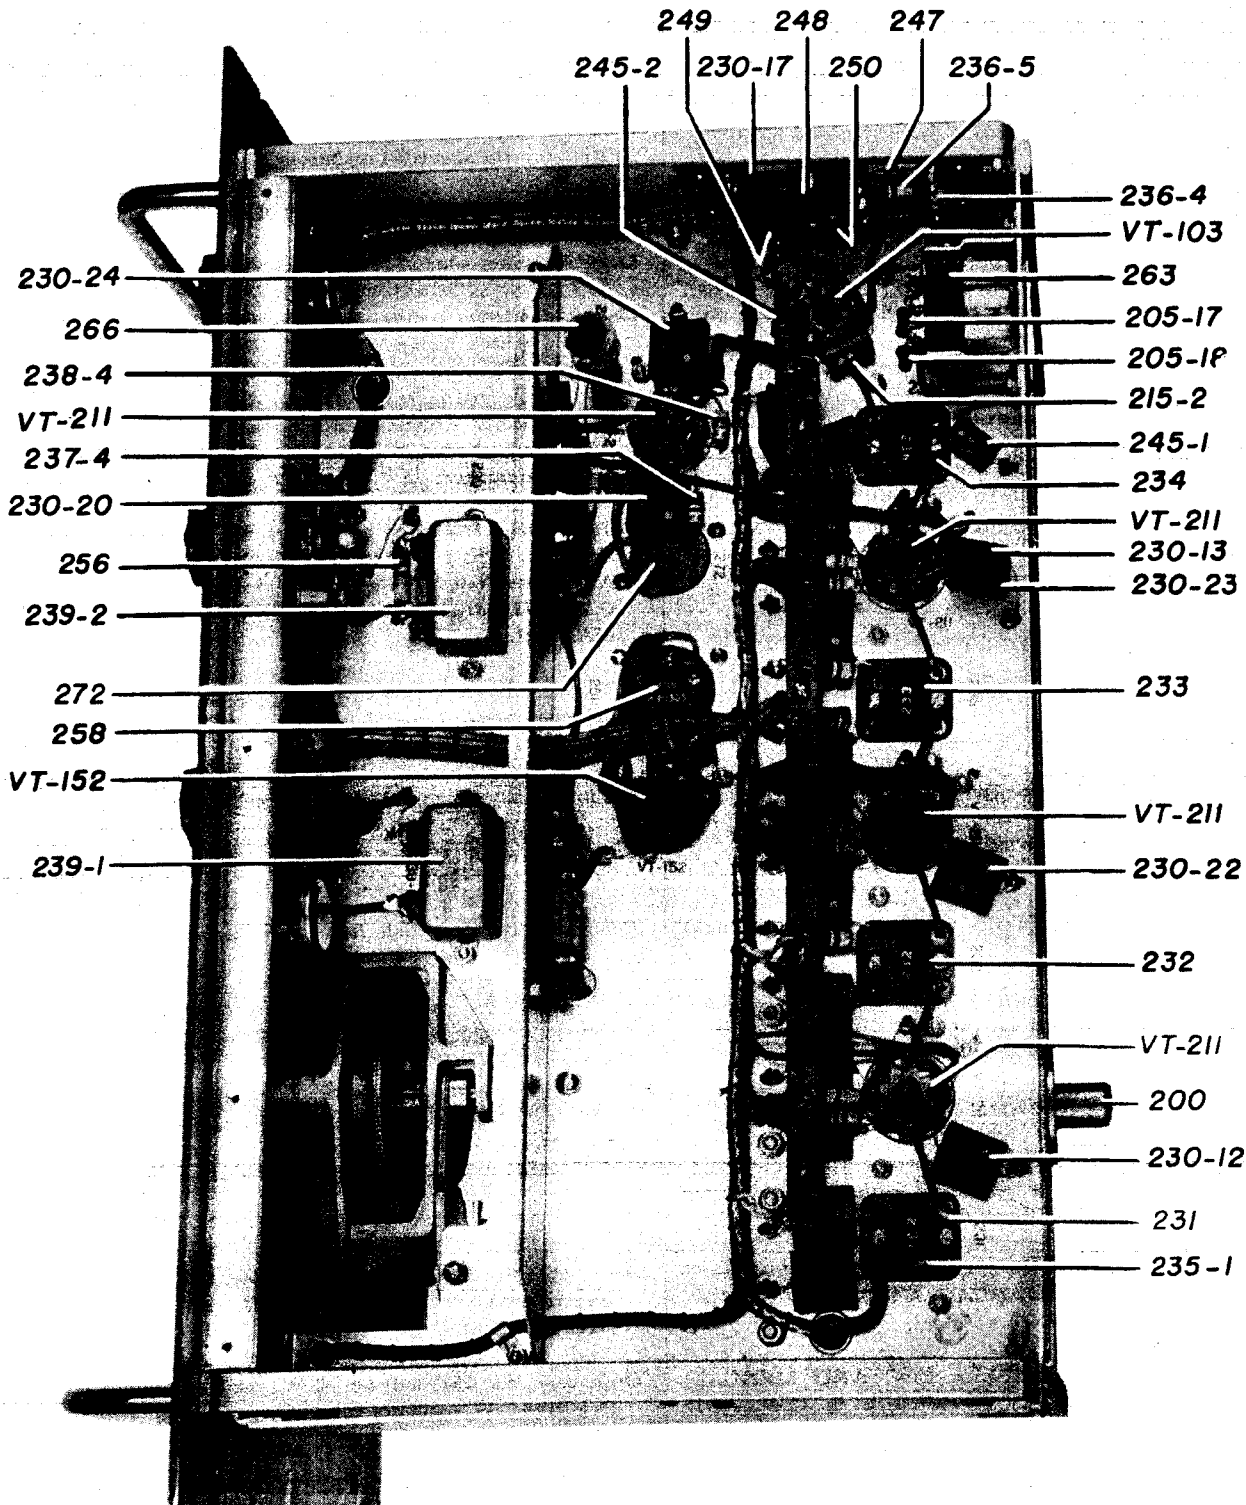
Radio Receiver BC-639-A, Left Oblique, Bottom View
